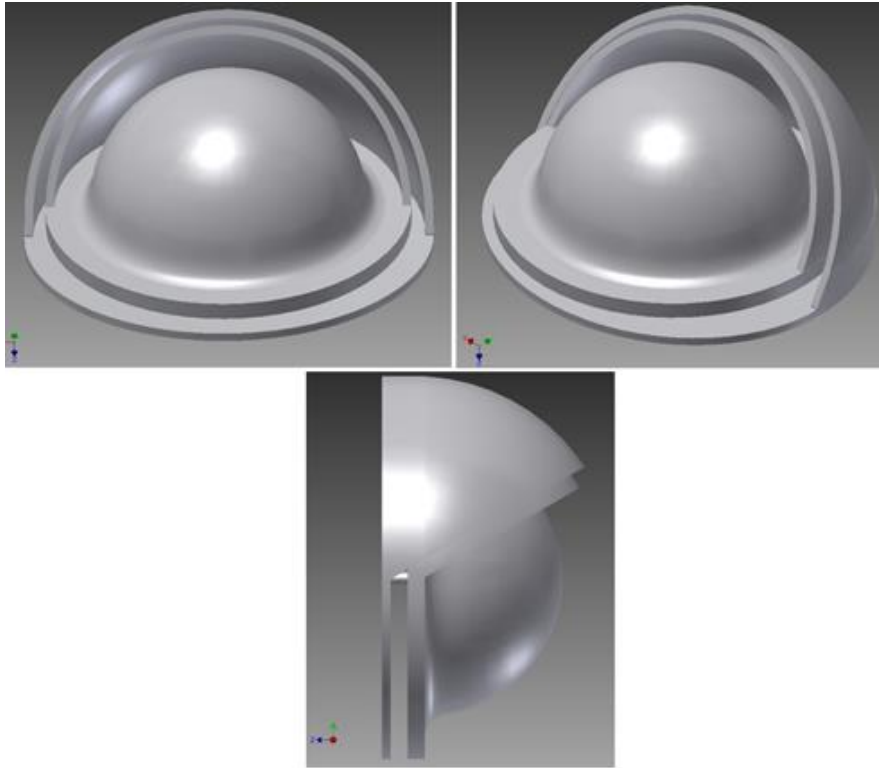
CAD Images of 60° sparger assembly (iteration #1)
